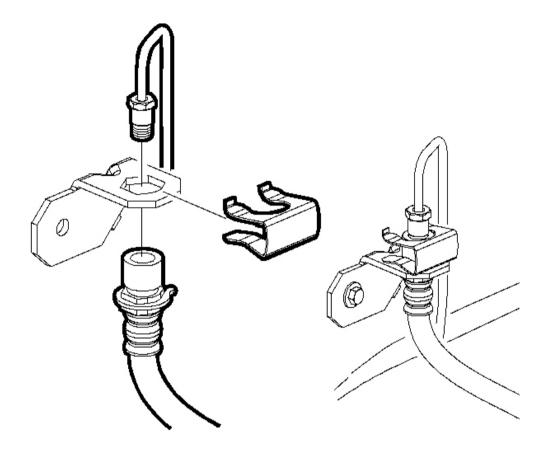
Removing/Installing Brake Hose Courtesy of GENERAL MOTORS CORP.
